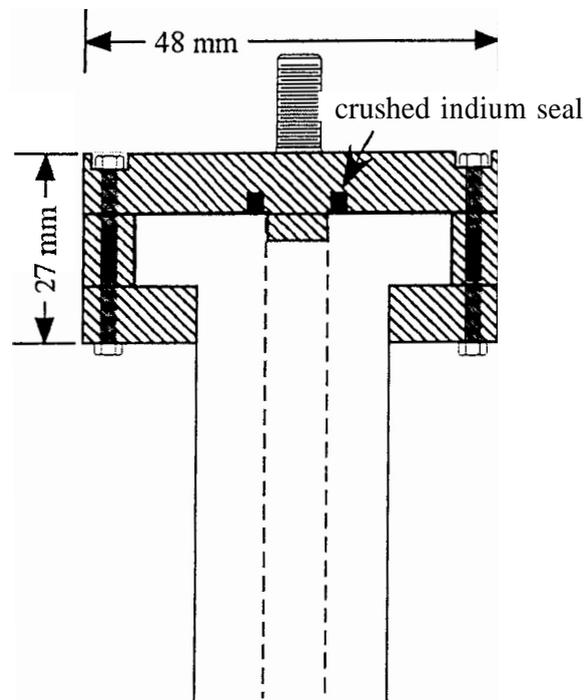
Aluminum endcap with intruding boss and crushed indium seal. Top endcap shown is studded for mount on closed-cycle helium refrigerator cold finger.
